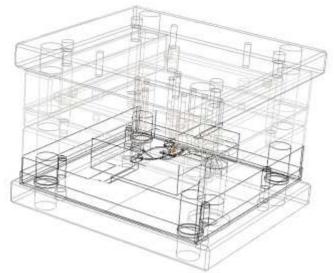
Wireframe View Assembly for Pressure Die Casting of Door Handle
